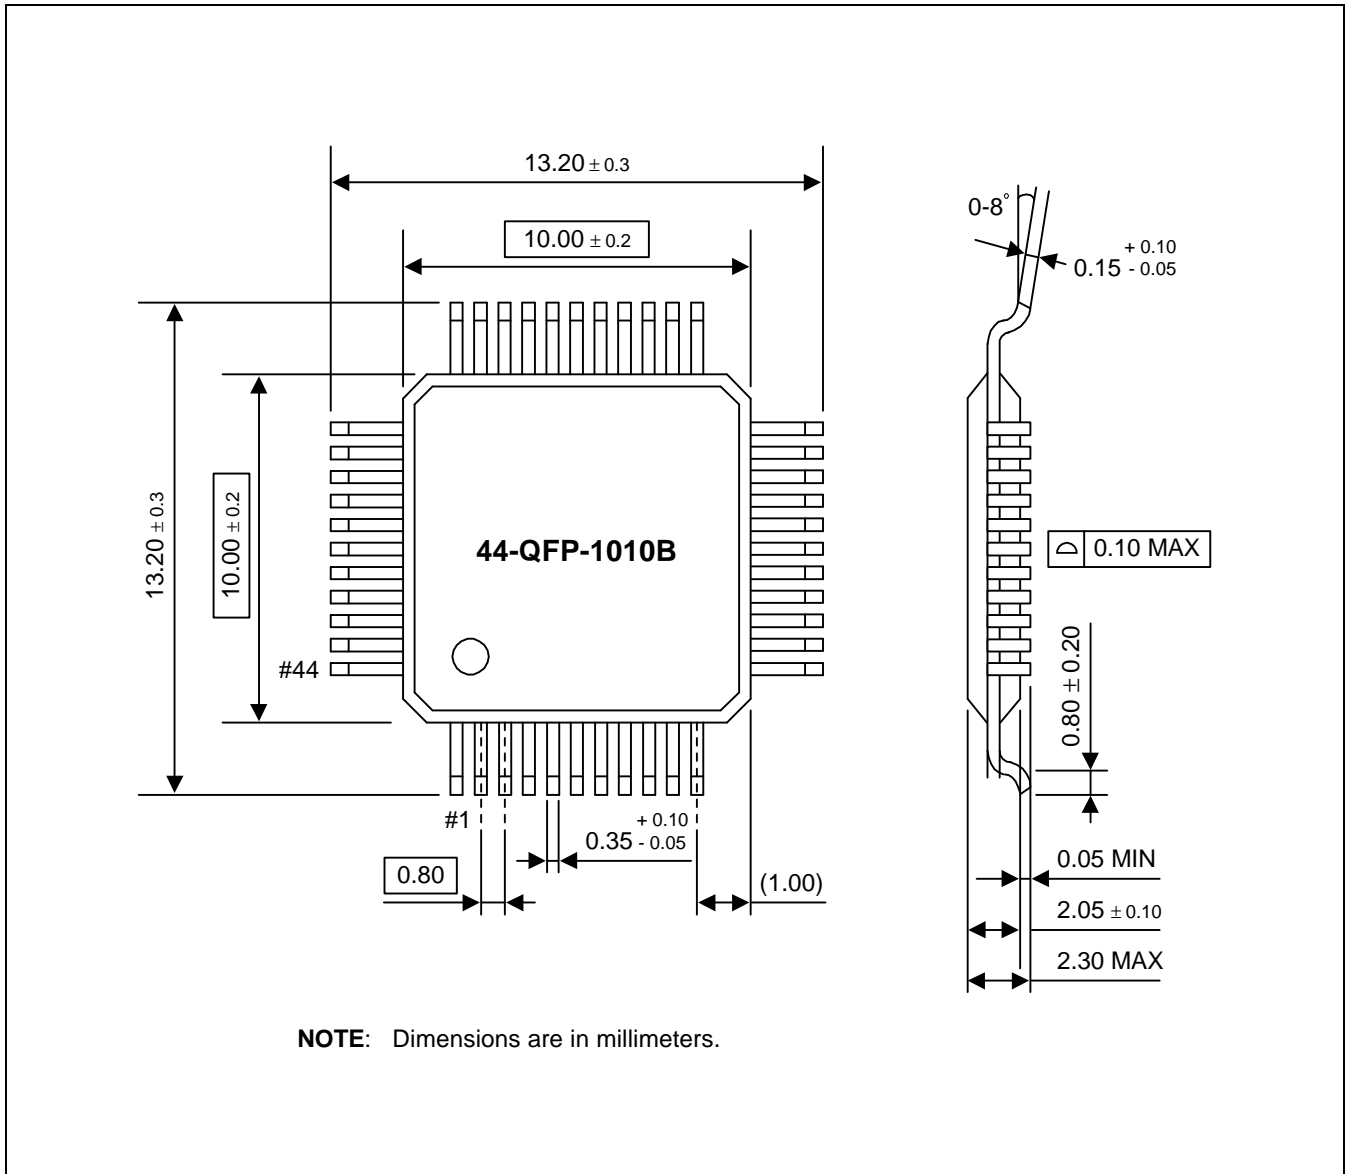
44-Pin QFP Package Dimensions (44-QFP-1010B)
